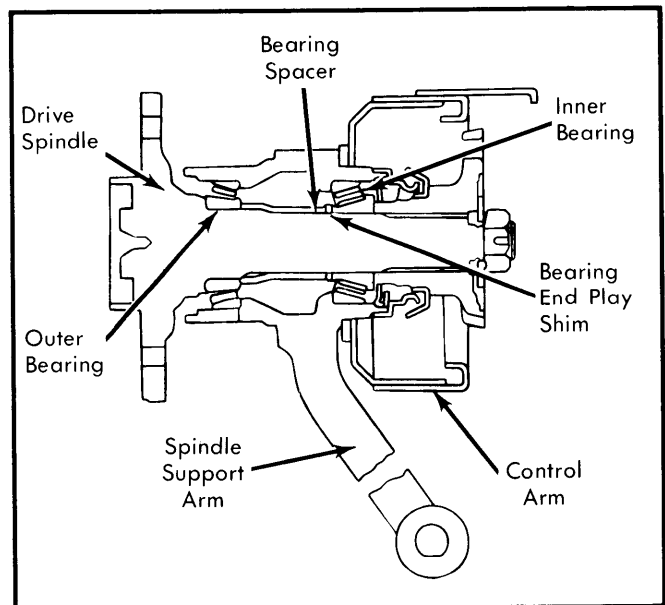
Corvette Rear Wheel Bearing Adjustment
